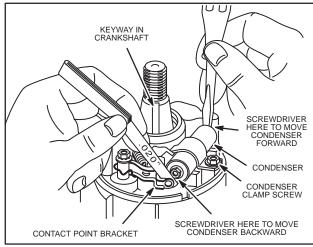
ADJUSTING STYLE II BREAKER POINTS
